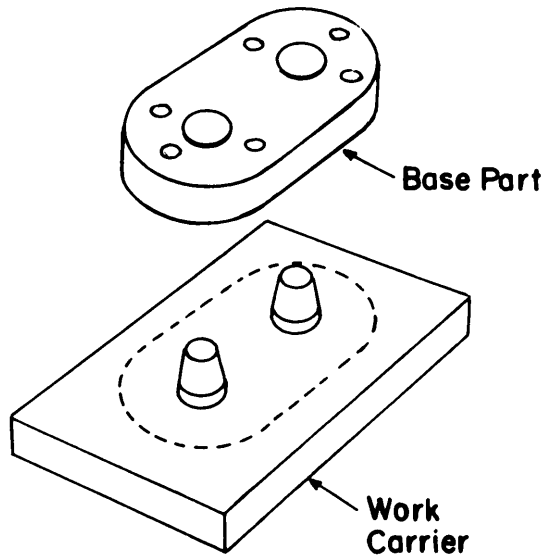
Design of Base Part for Mounting on Work Carrier
